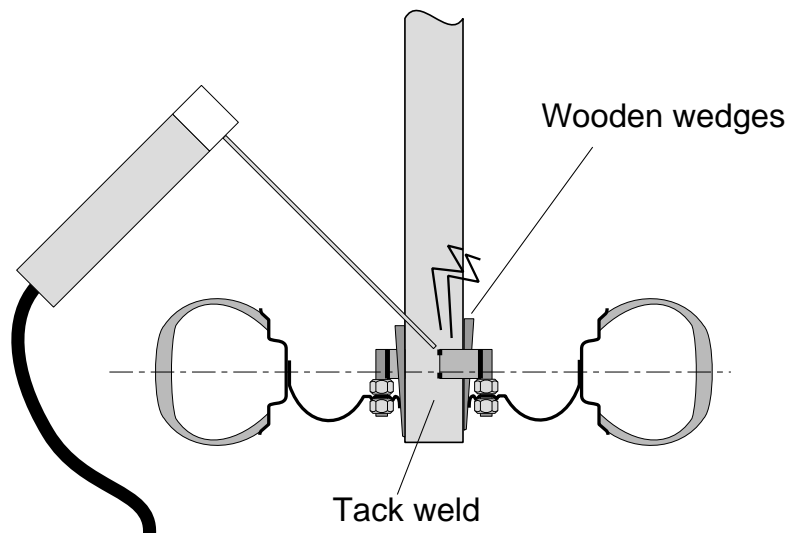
tyre, wheel and axle tube during tack welding stud support struts
